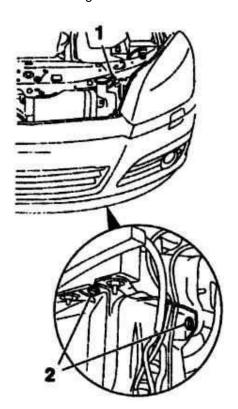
Bolts fastening faroomyvatelya: 1, 2 - Bolts
